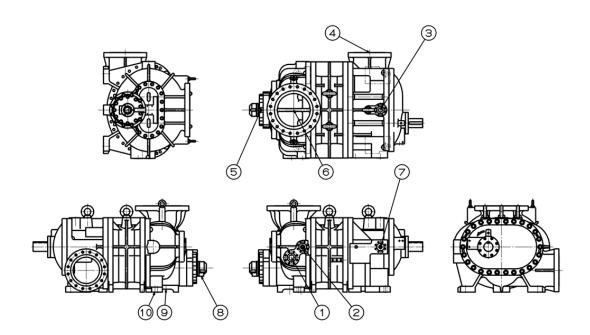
Dimensions of the MYK Flange Joint Part (Compressor)
